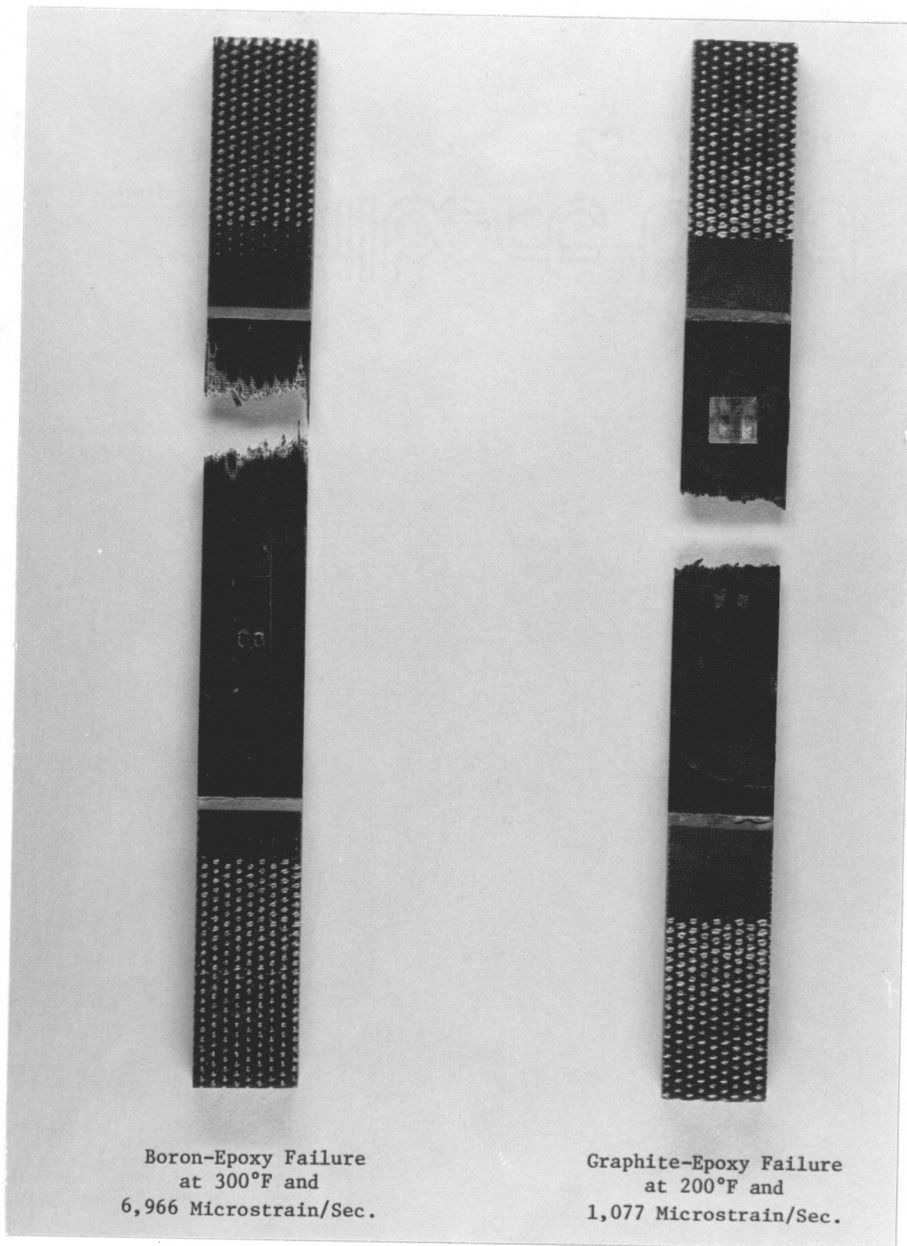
Typical Tension Failures of Boron/Epoxy and Graphite/Epoxy Specimens.
